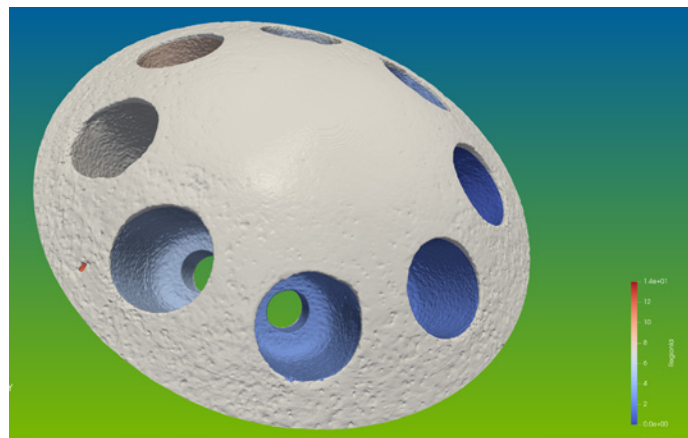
A view of the outside surface and hole counter bores of an ECN Spray G injector
